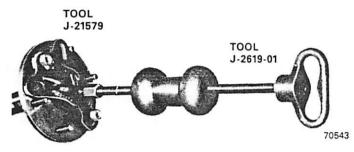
F-24 Axie Shaft Removal—Cherokee-Wagoneer-J-10 Truck
